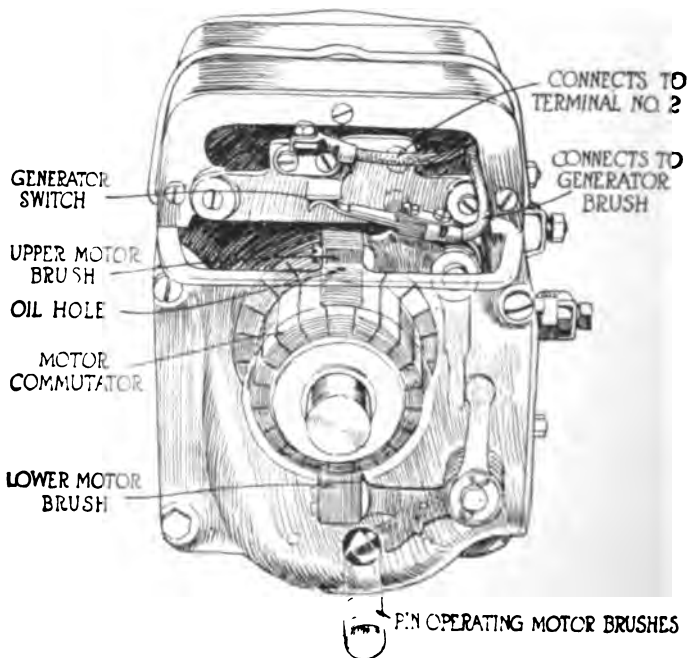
End view of Delco electrical unit used on Hudson Super-Six, showing position of motor brushes and method of raising and lowering them
